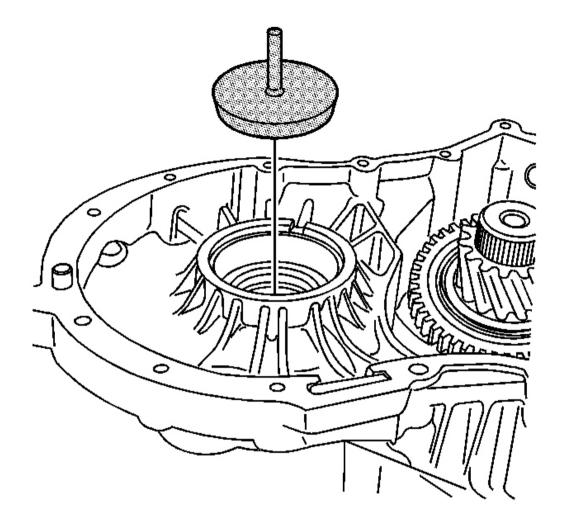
Installing J 44388-2 Into The Left Differential Side Bearing Race Courtesy of GENERAL MOTORS CORP.
